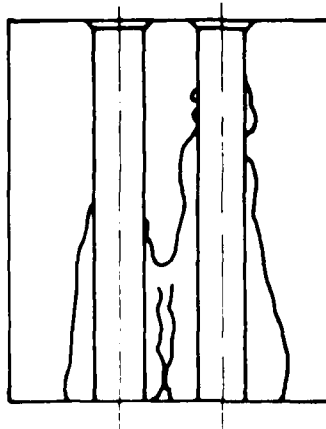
(v) FRACTURES TYPE (av) SPECIMENS. REAMED 4 mm, ADHESIVE BONDED
